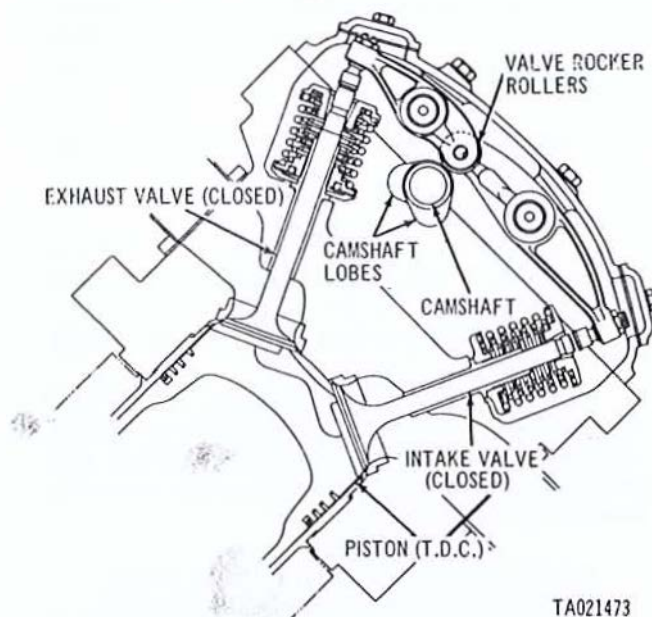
Position of camshaft lobes with intake and exhaust valves closed.
